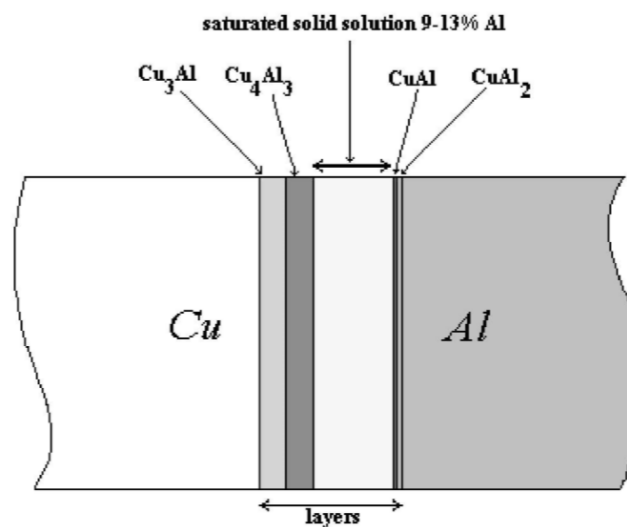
Typical example of welding zone composition at the interface of Al/Cu cold roll welding, [22]
